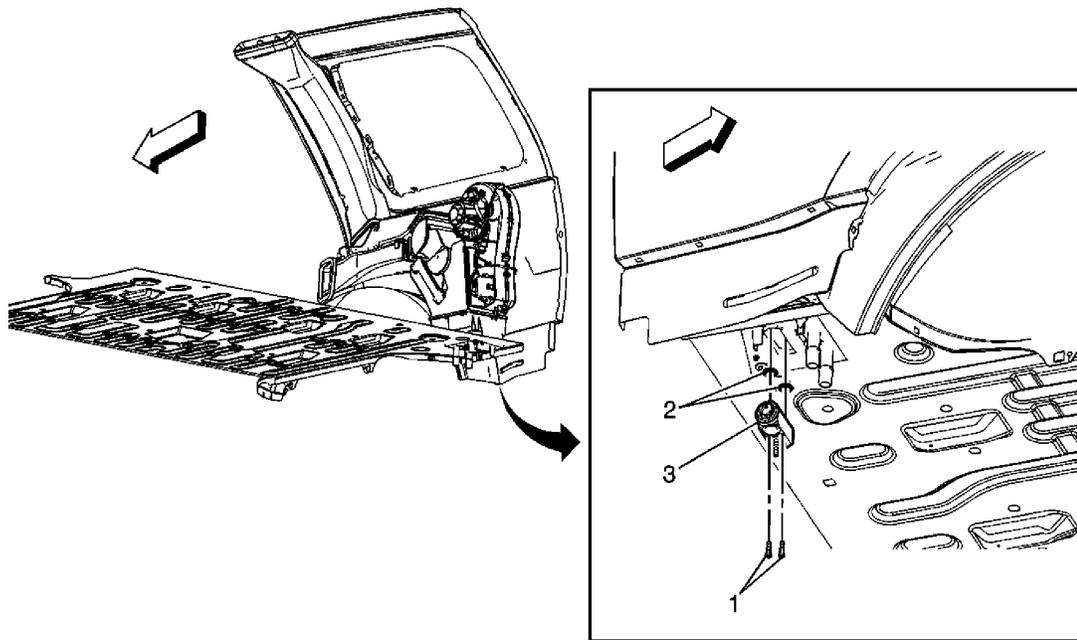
Identifying Auxiliary Evaporator Thermal Expansion Valve & Components
